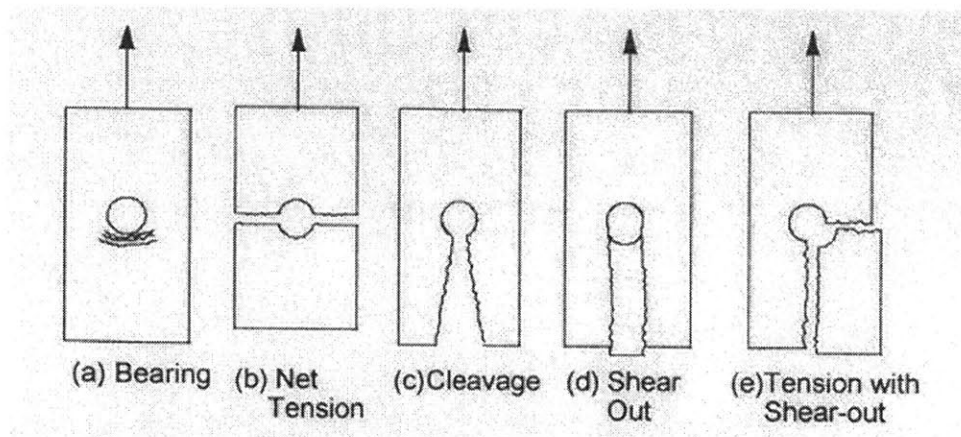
Typical modes of failure of FRP bolted connections [4]
